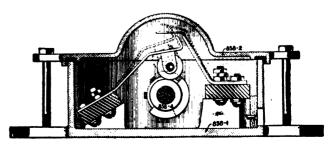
Sectional View of Figs. 2241-2242, Showing Operation of Parts.
